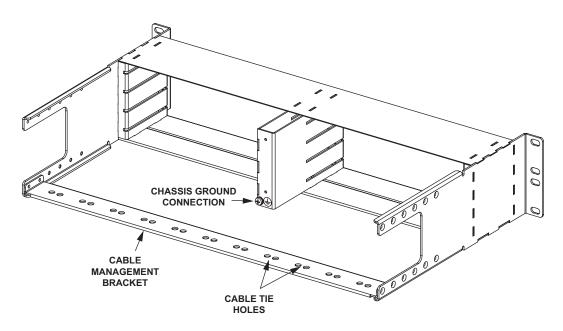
2RU Chassis Ground Connection (Rear View shown without Power Kit)
